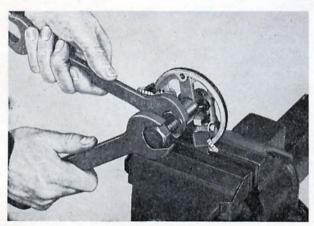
Withdrawing the commutator end bracket bush using a bolt, nut and distance piece
